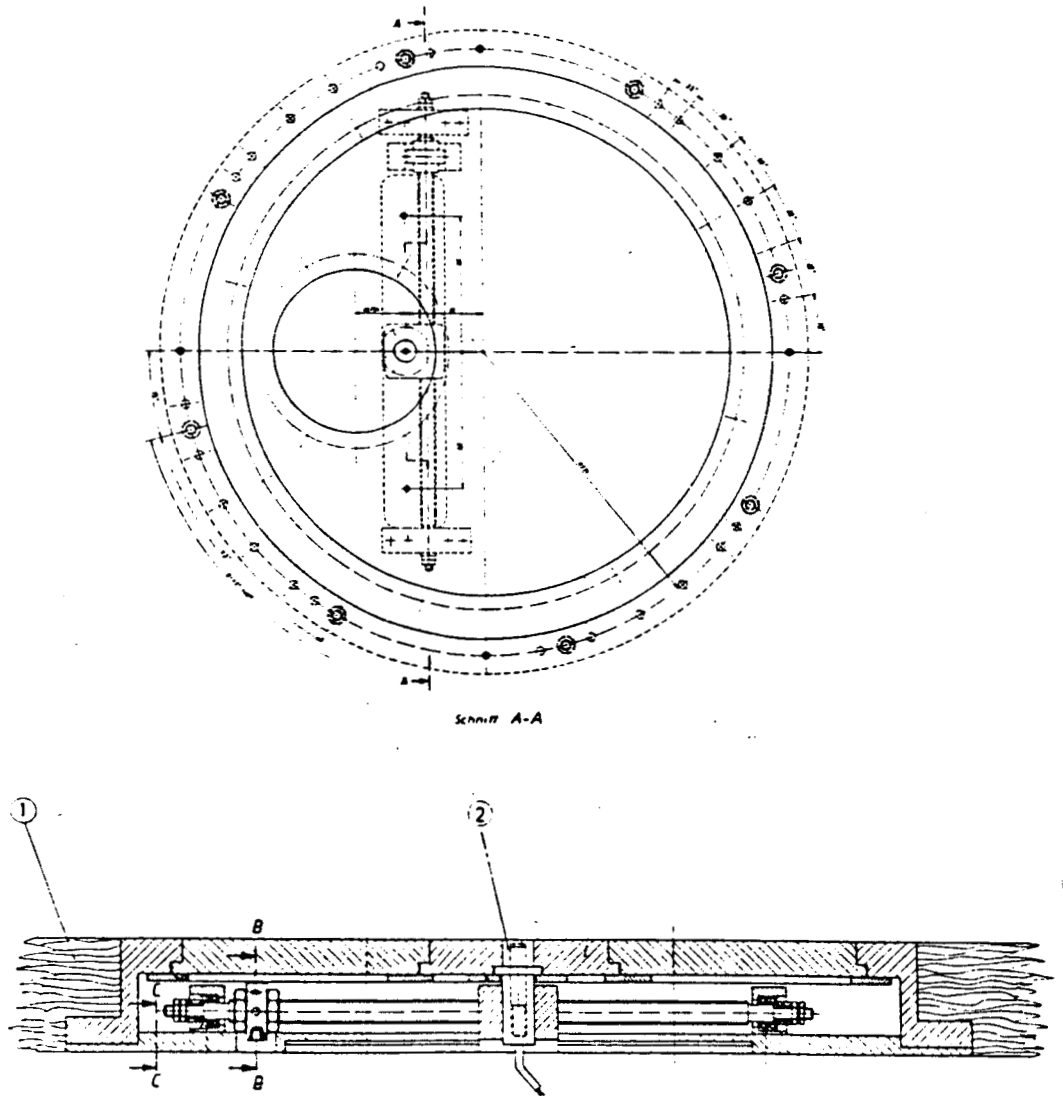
Sweep Mechanism for Hot Wire and Hot Film Anemometer
